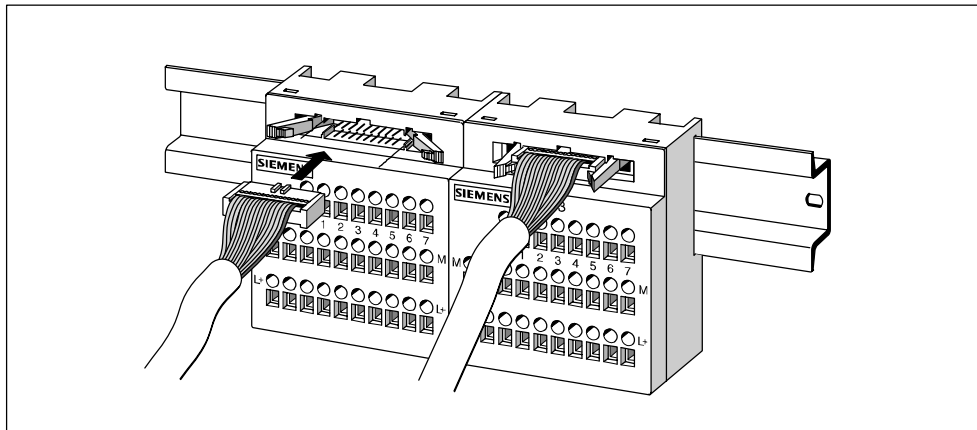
Insert the Connecting Cable into the Terminal Block
